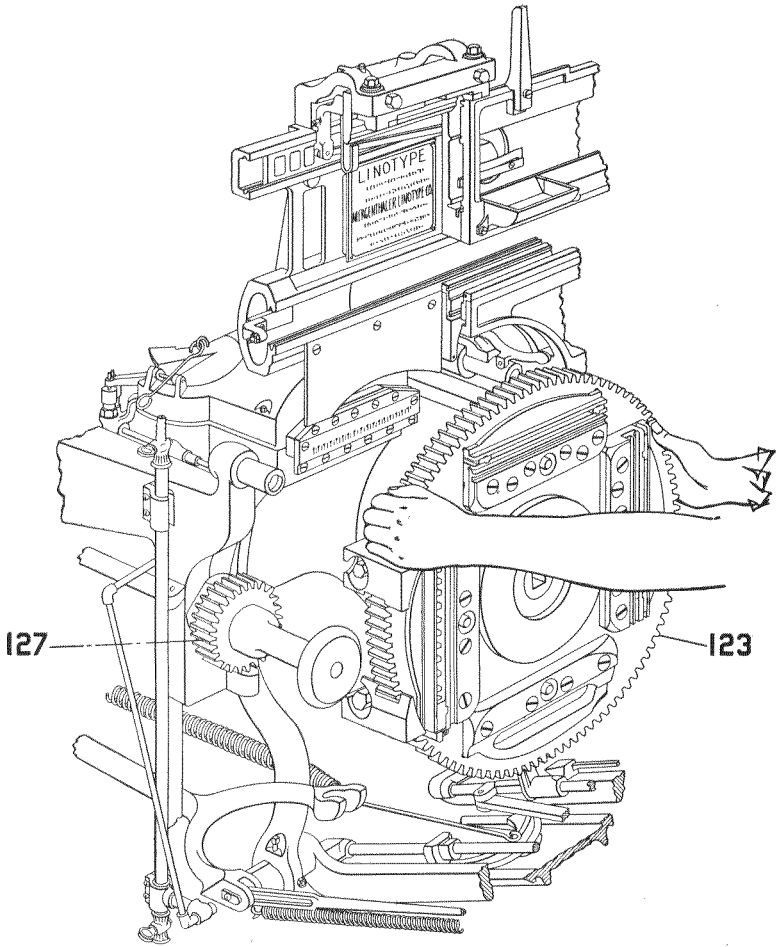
View showing the vise lowered and the mold disk and slide being pulled forward.
